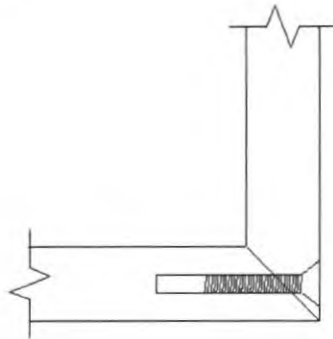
Fastener 1/4 - 20 HWH Tek at the guard corners
